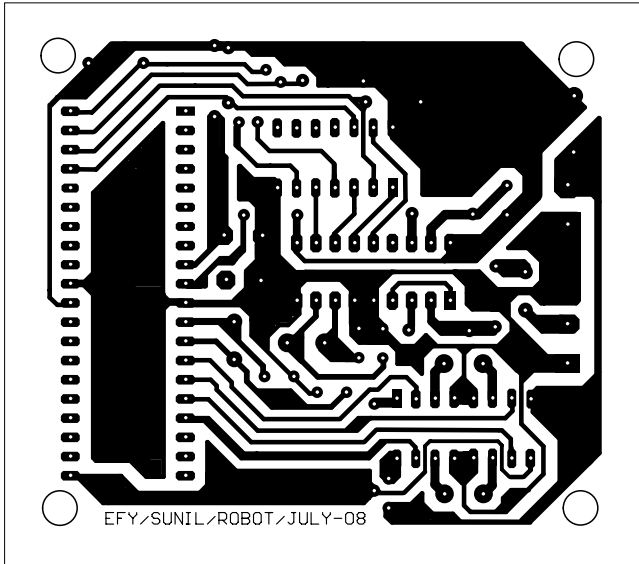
An actual-size, single-side PCB layout for cellphone-operated land rover Fig. 5: Component layout for the PCB
